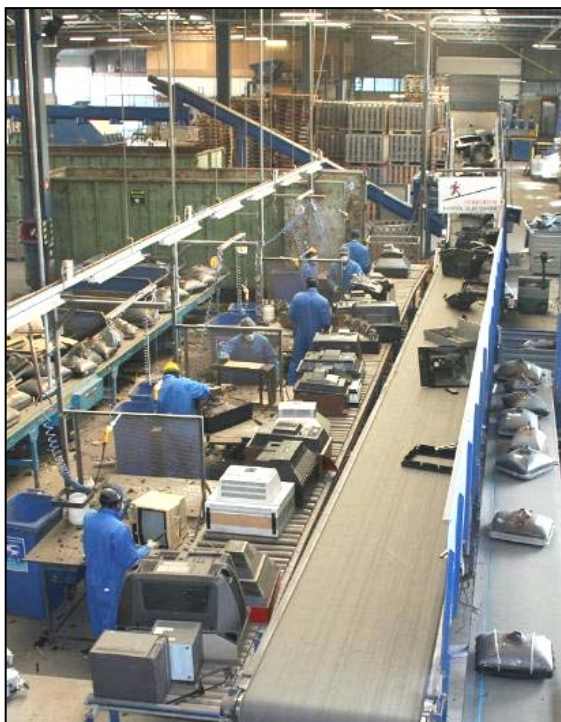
Coolrec – Area on the left for disassembly of television sets and monitors; conveyor on right delivers disassembled CRTs for mechanical cutting
